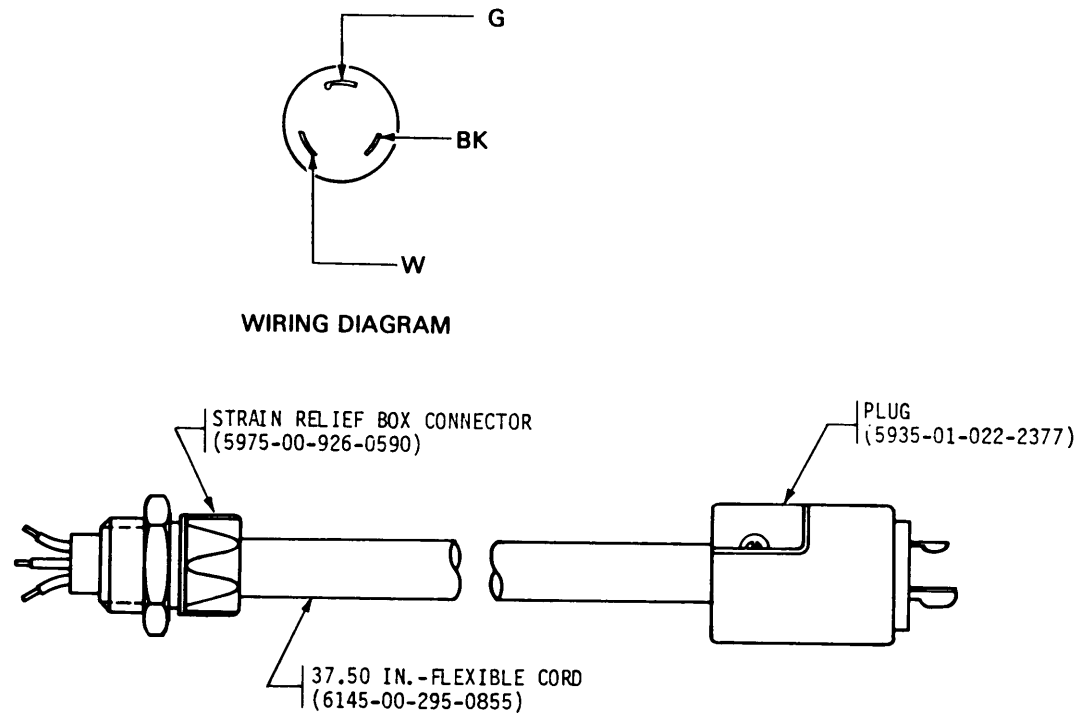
Power Cable Assembly, 11021165, Unit 1, M35A2.
